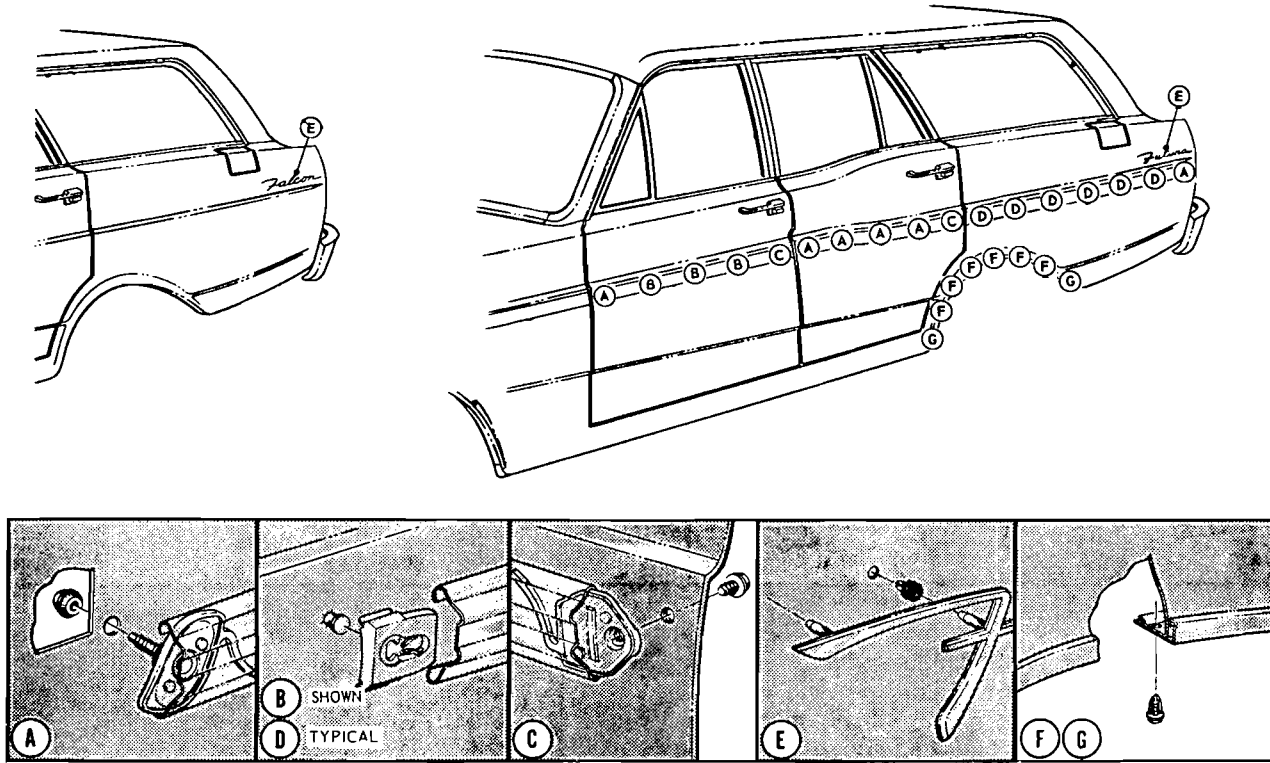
Falcon Exterior Side Mouldings—Model 71
